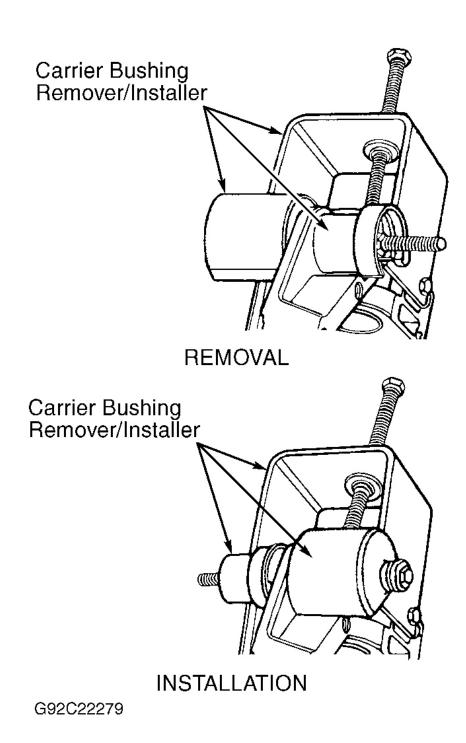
Removing/Installing Carrier Case Bushing Courtesy of GENERAL MOTORS CORP.
